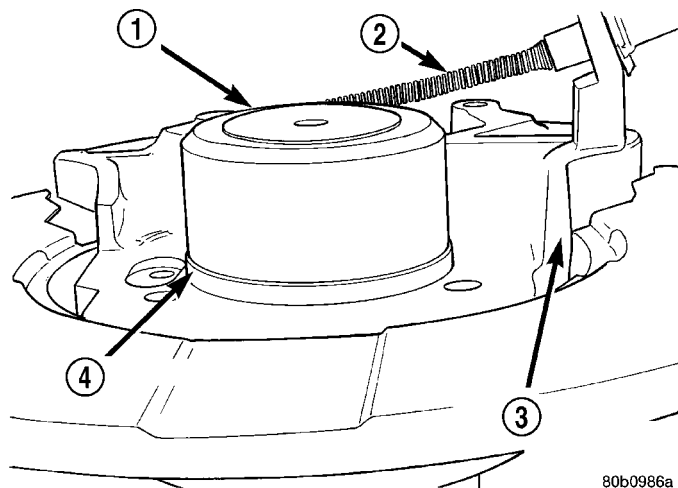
Hub/Bearing Removal From Caliper Adapter
